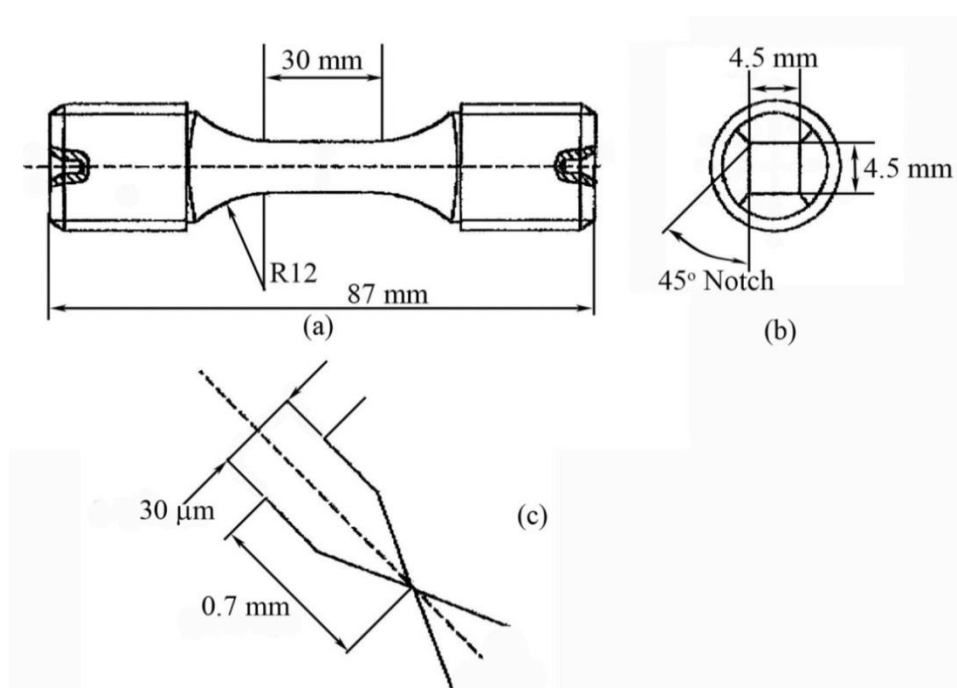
Geometry of corner-crack specimen used for fatigue threshold and crack propagation test based on RR drawing RLH5325.
